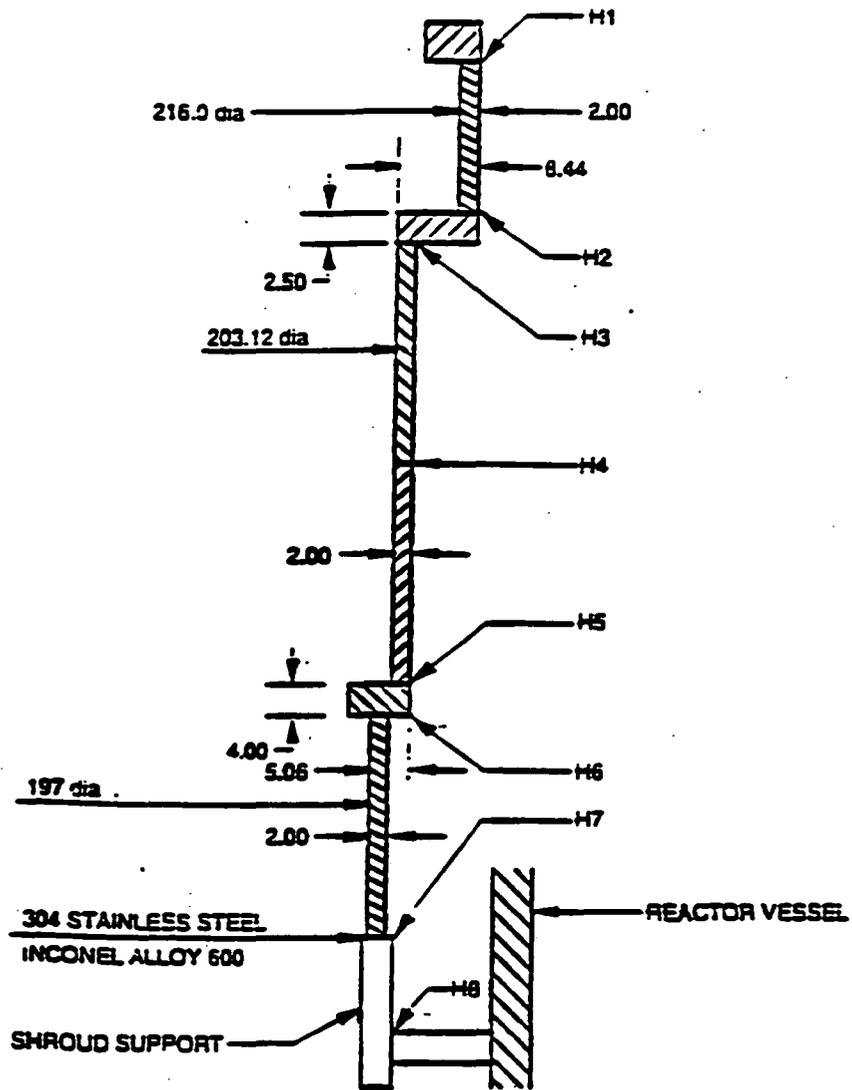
Shroud Horizontal Weld Designations
